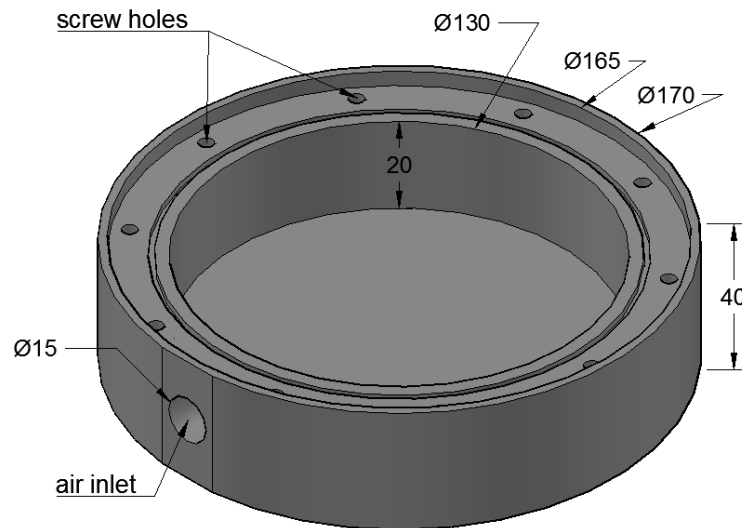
Air-bearing device chamber (dimensions in mm)
